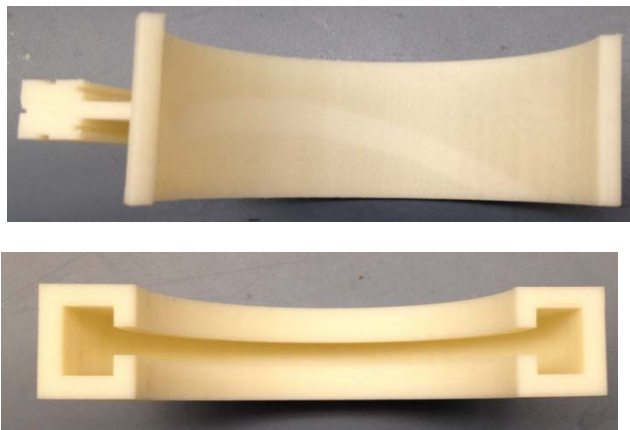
Arm-bed used in device (top) and mating track (bottom) for arm wrist rotation. Components were fabricated using a 3D printer.
